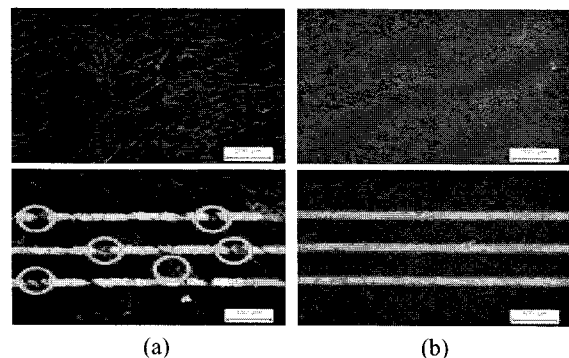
Optical micrographs of surface after injection molding and fabricated pattern by laser; (a) sample 1 and (b) sample 2.
